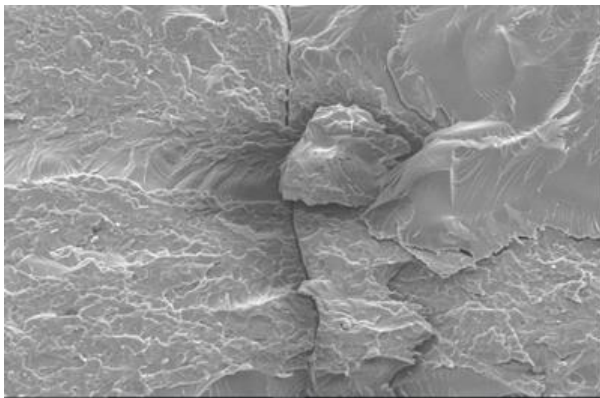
Brittle part of fracture for the immersed 304 SS at -60°C
